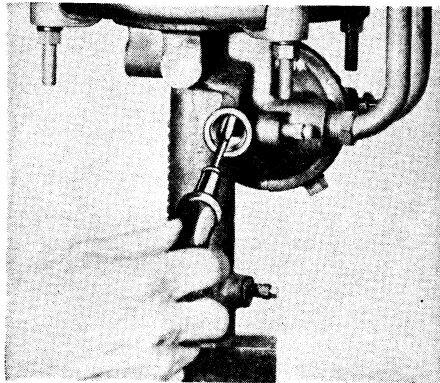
Removing Hydrovac cylinder end plug and piston release spring
